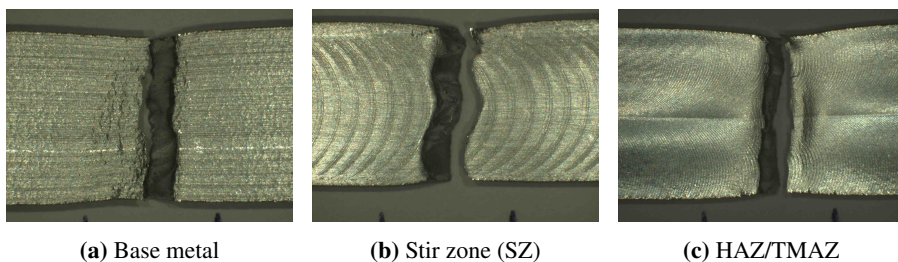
Macro images of the tensile specimens tested longitudinal to the welding/extrusion direction.
